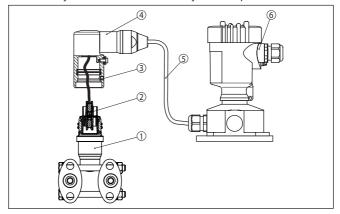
VEGADIF 85 in IP68 version, 25 bar and lateral cable outlet, external housing
